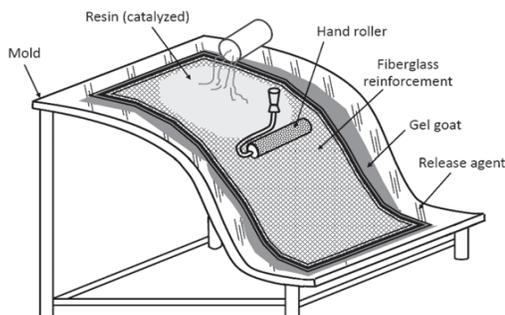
Wet / Hand lay-up Fabrication process[16].
